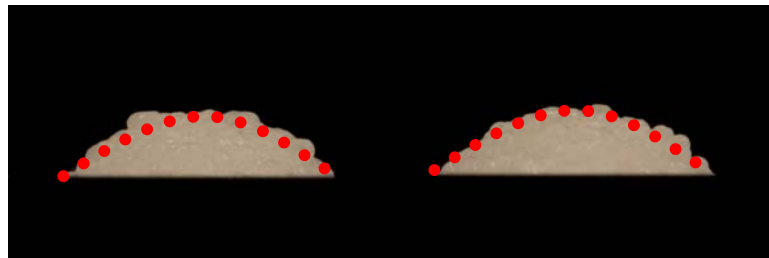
Photographs of printed dome constructs. (Left) Open-Loop. (Right) Local-GGF.
